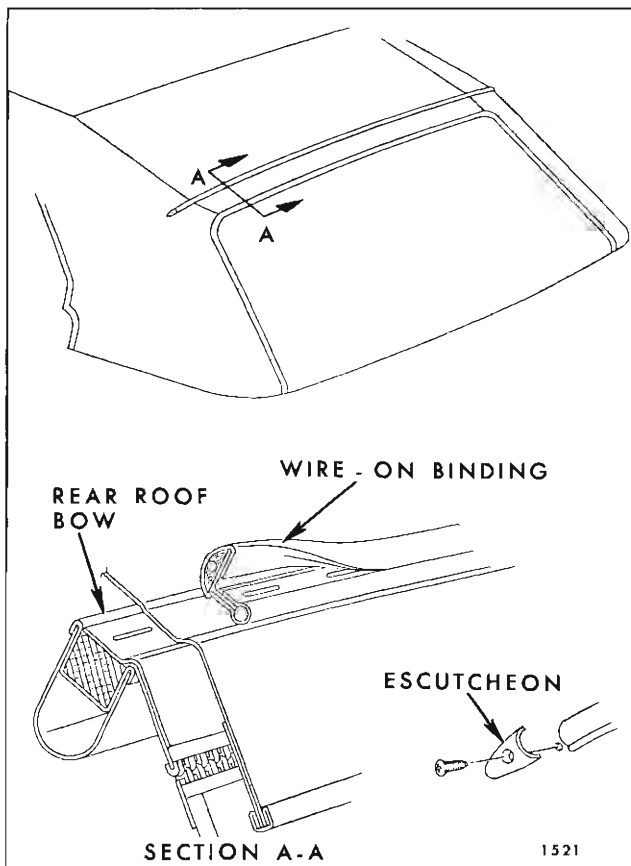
I-32—Rear Roof Bow Wire-On Binding
